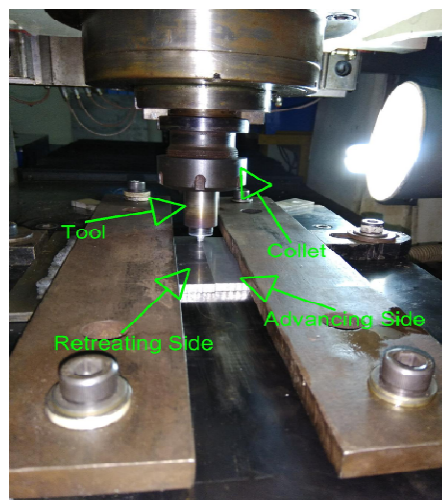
Weld Position of Dissimilar Aluminium Alloys of Friction Stir Welding
